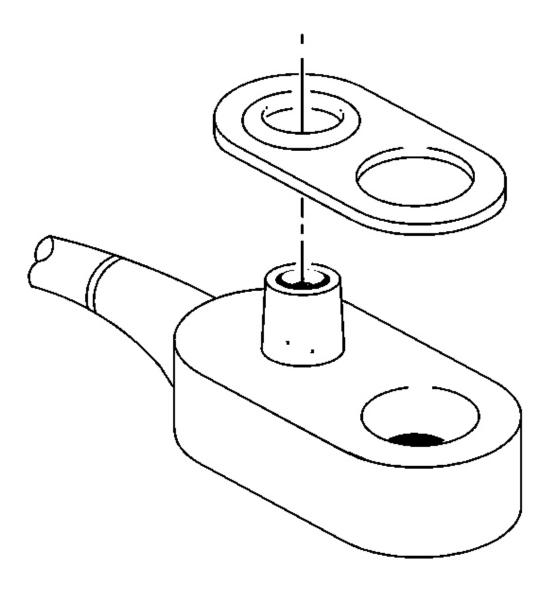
View Of Air Bleed Pipe Sealing Gasket Courtesy of GENERAL MOTORS CORP.
